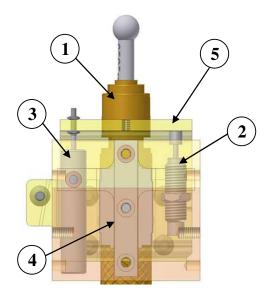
Mechanical assembly of the grinding tool mounting construction. 1 – Grinding tool, 2 – Spring, 3 – Linear potentiometer, 4 – Linear slide guide, 5 – Grinding tool holder.
